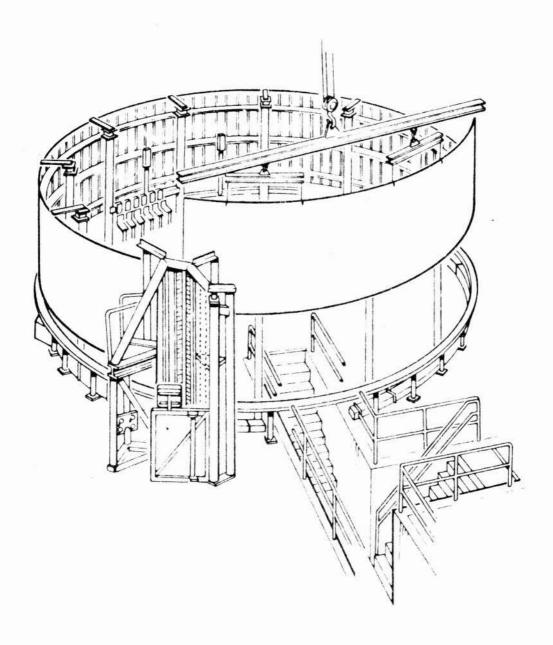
Installing LH2 Quarter Panel in Assembly and Weld Fixture
